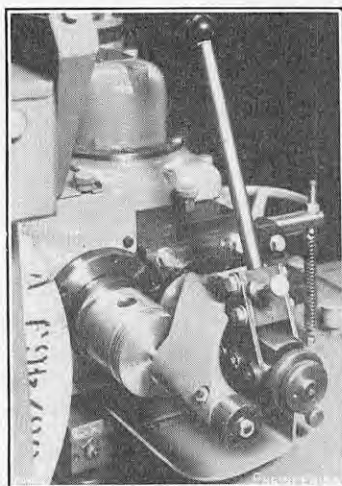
PISTON HELD BY CENTRING DEVICE.
